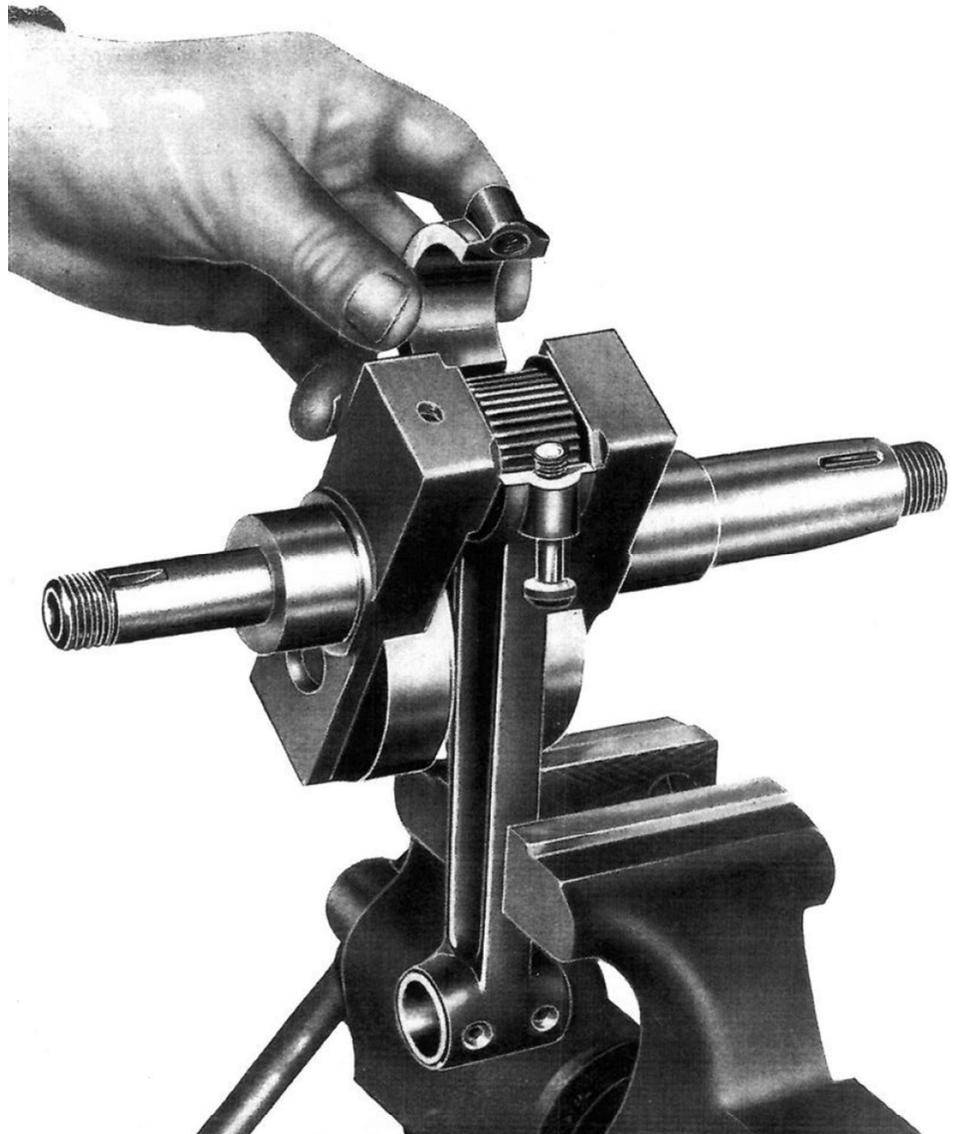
How to assemble the connecting rod and the needles on the crankshaft.
